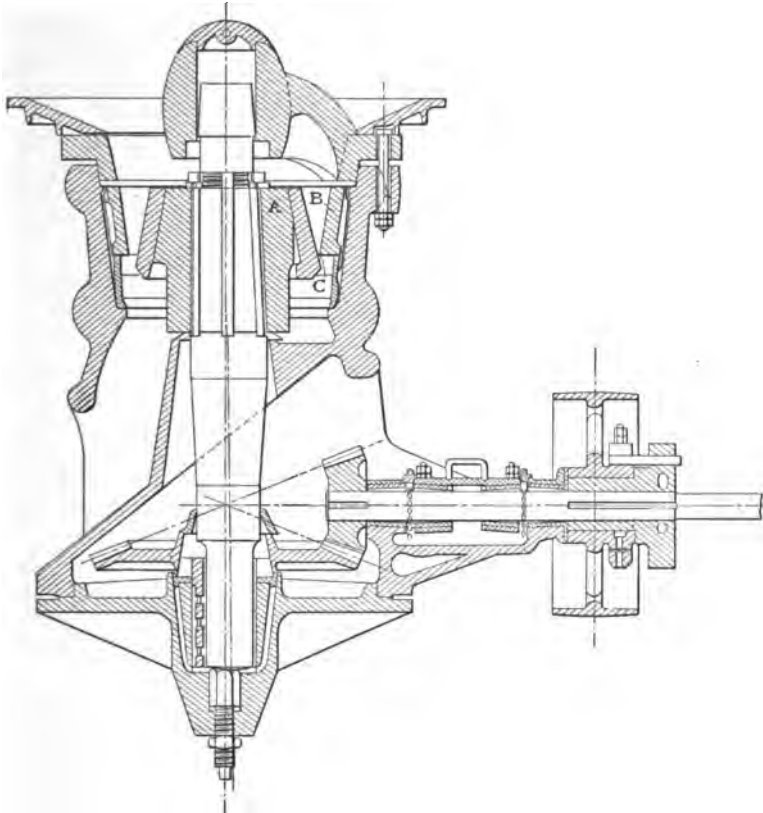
GYRATORY BREAKER FITTED WITH SHORT BREAKING HEAD AND CONCAVES.
